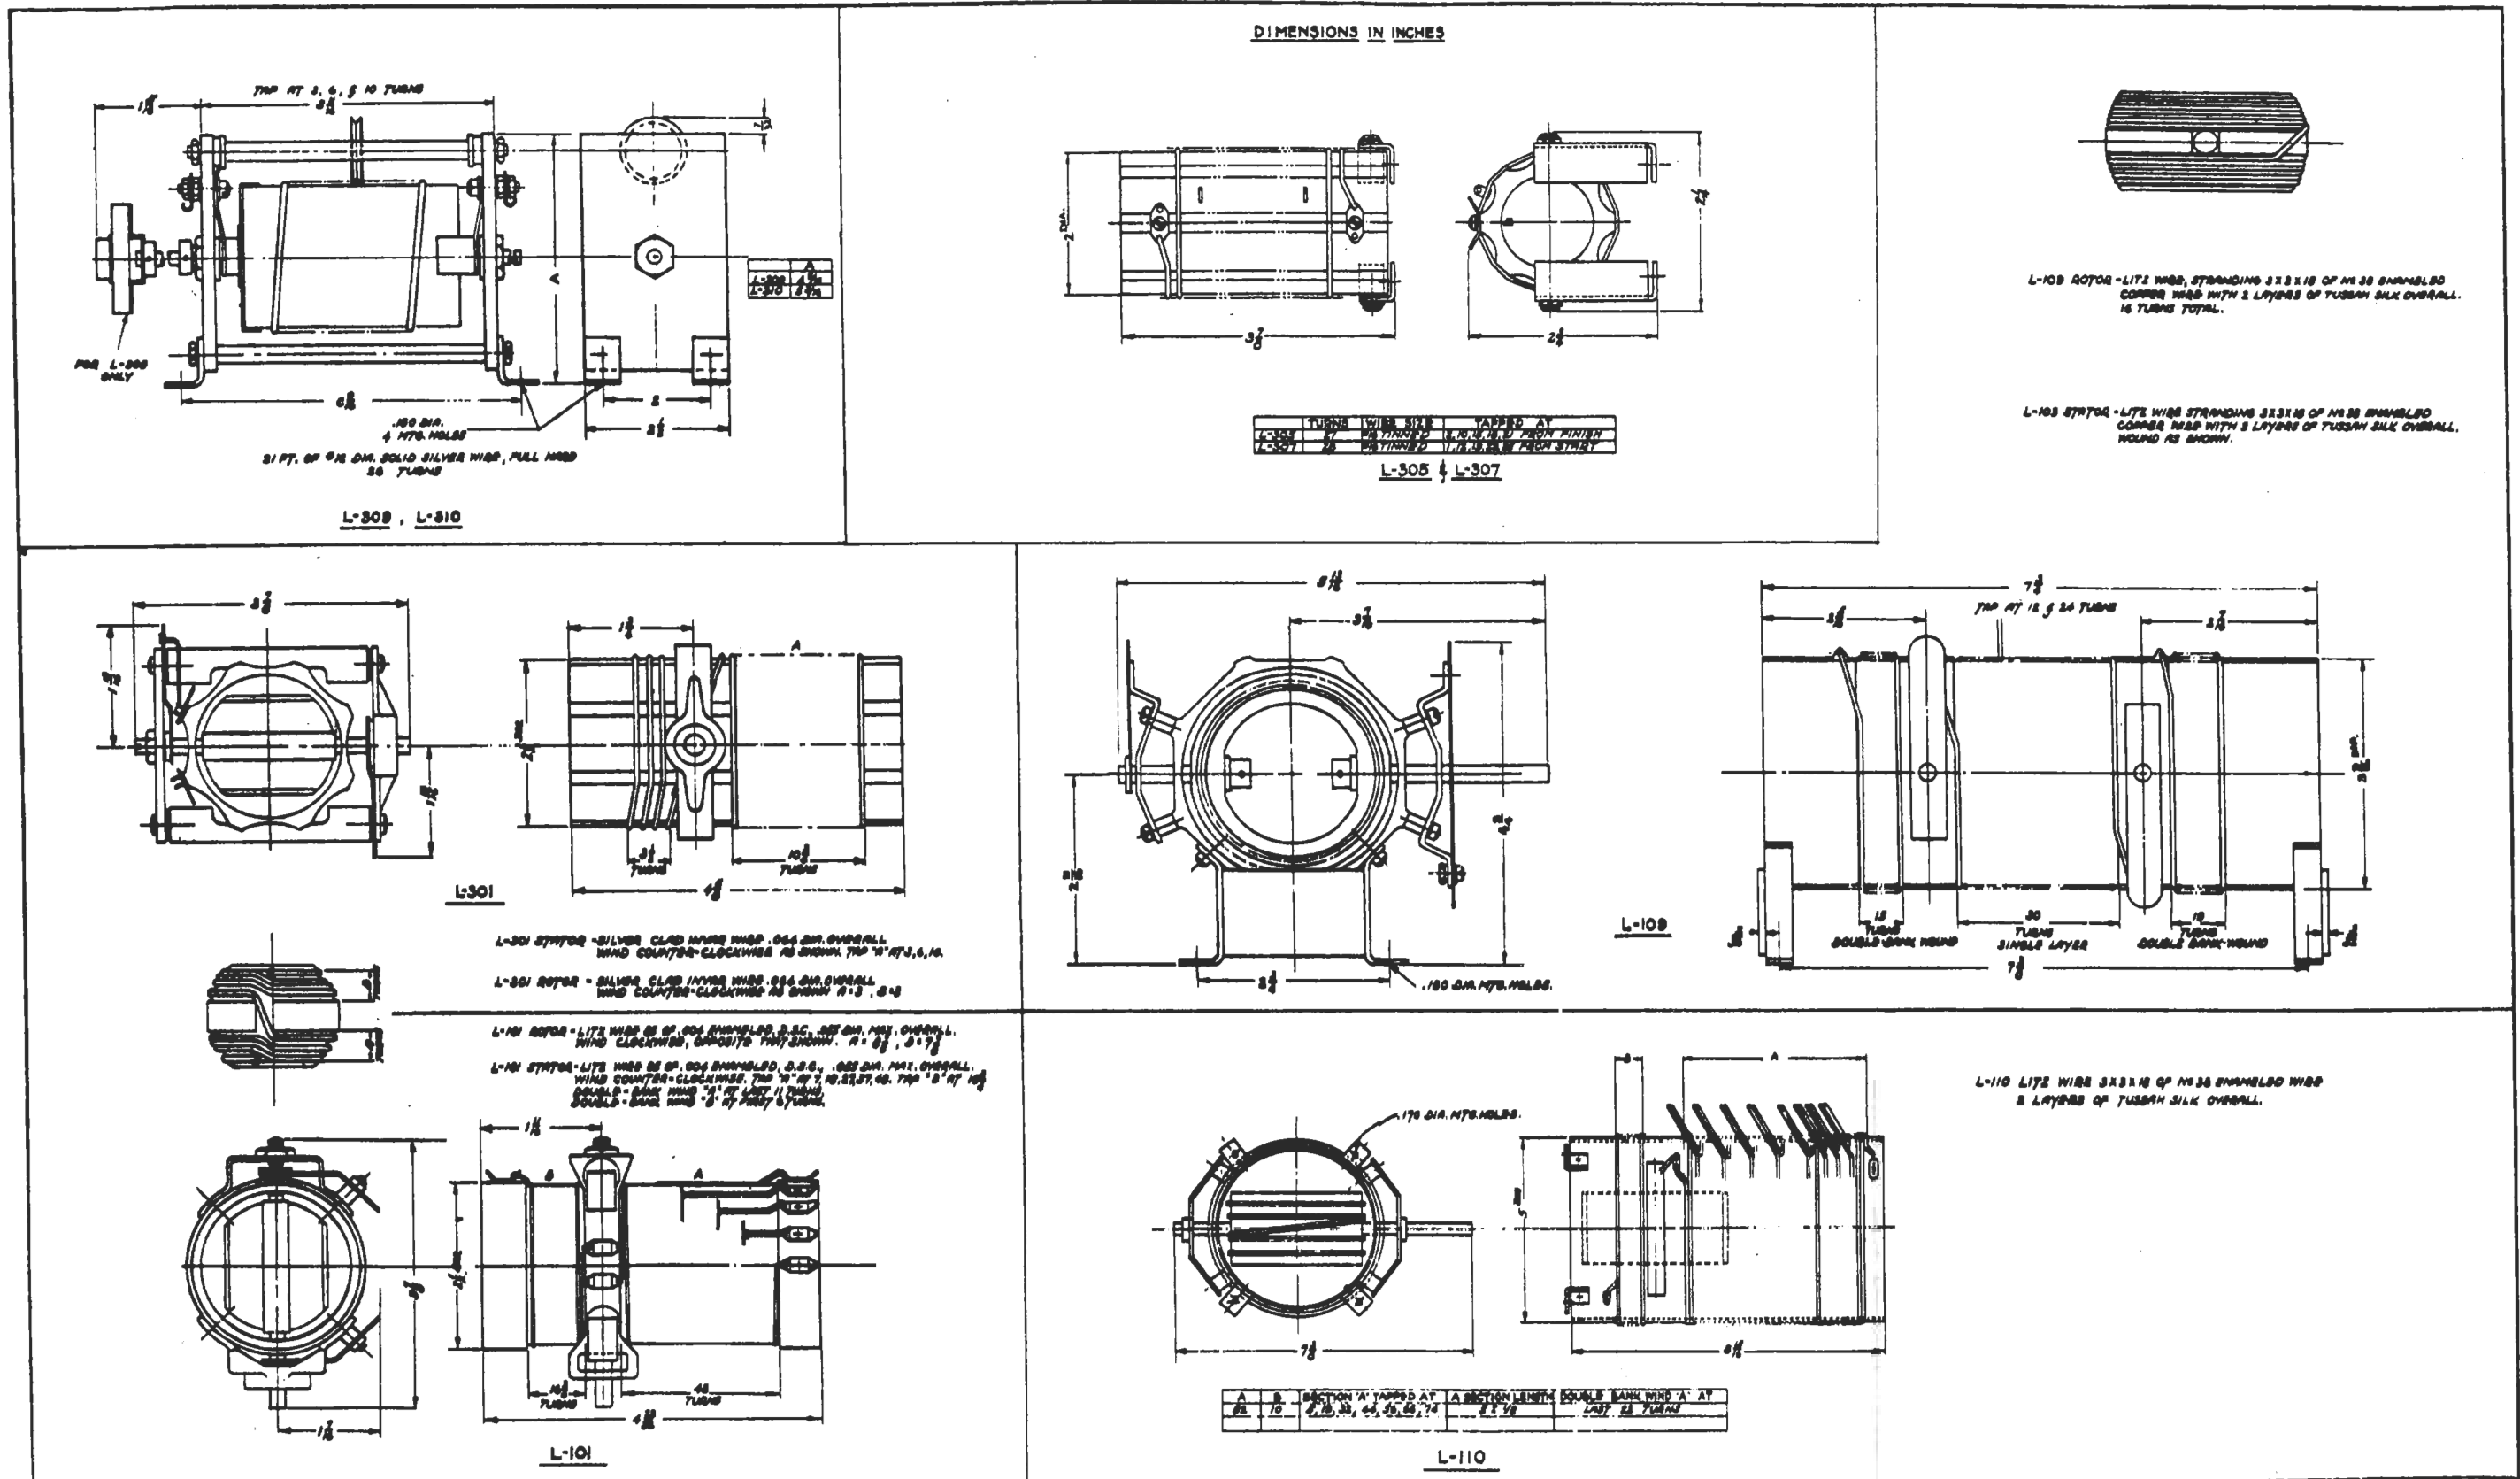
Tuning Coils and Variometers, Winding Data and Dimensional Drawings (Drawing T-7608451)
